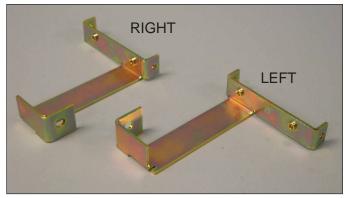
Identifying the Aux. CT Module Mounting Brackets.
